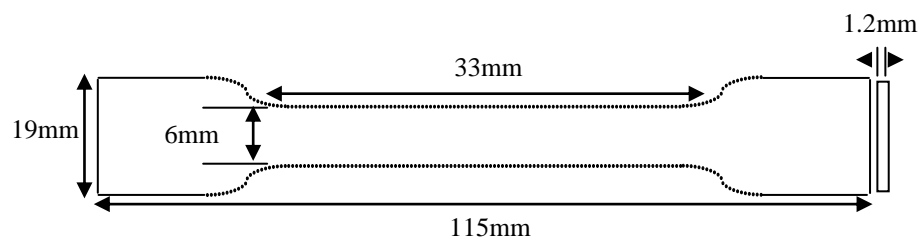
Geometry of the dumbbell shape specimens cut from compression moulded sheet.
